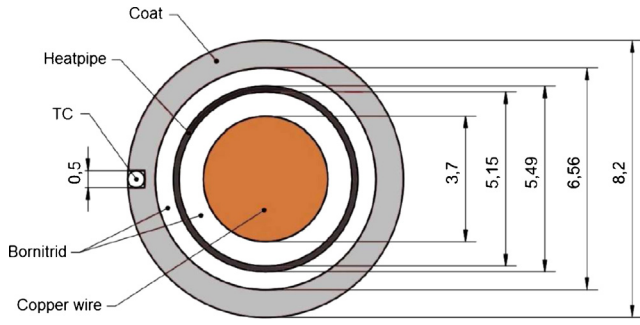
Schematic representation of the heated rod and the thermocouples inside the cladding. All dimensions are in mm.
